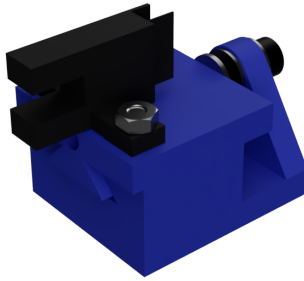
The 3d-printed encoder mount allows for adjustment of the Omron photointeruper to insure reliable operation of the encoder.
